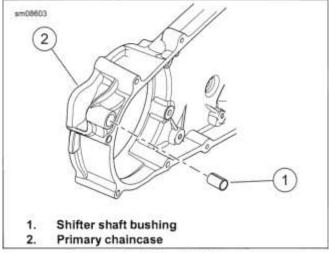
Shifter Shaft Bushings VENT HOSE
